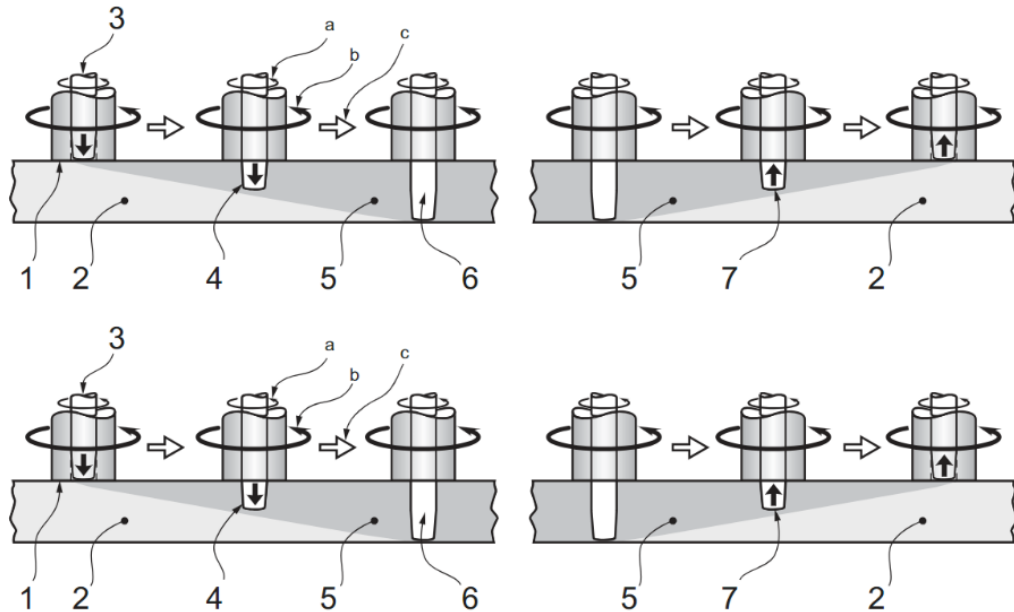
Illustrative reproduction of an adjustable tool probe. 1-Shoulder; 2-Unwelded Workpiece; 3-Probe; 4-Probe moving downward; 5-Welded Workpiece; 6-Probe at Required Position for Welding; 7-Probe moving upward [2-13].
